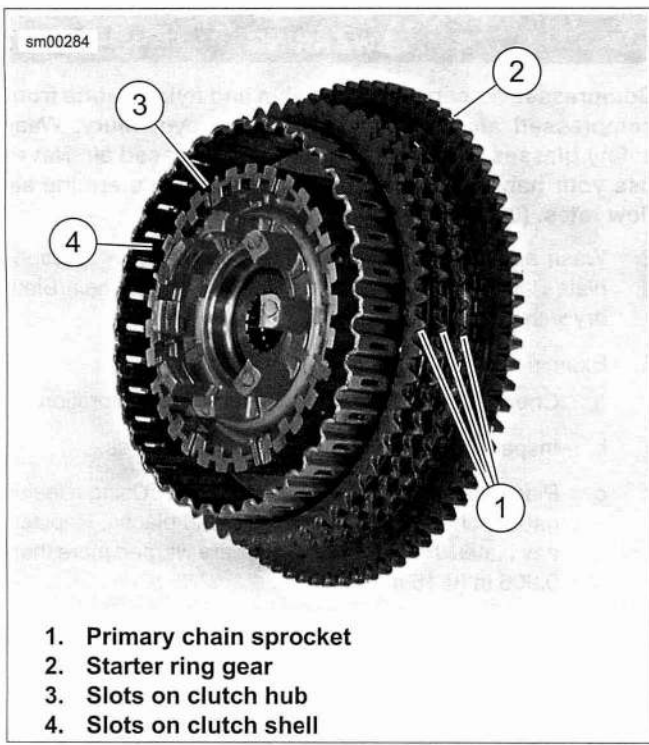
Checking Clutch Shell (Shell Removed from Primary Shaft)
